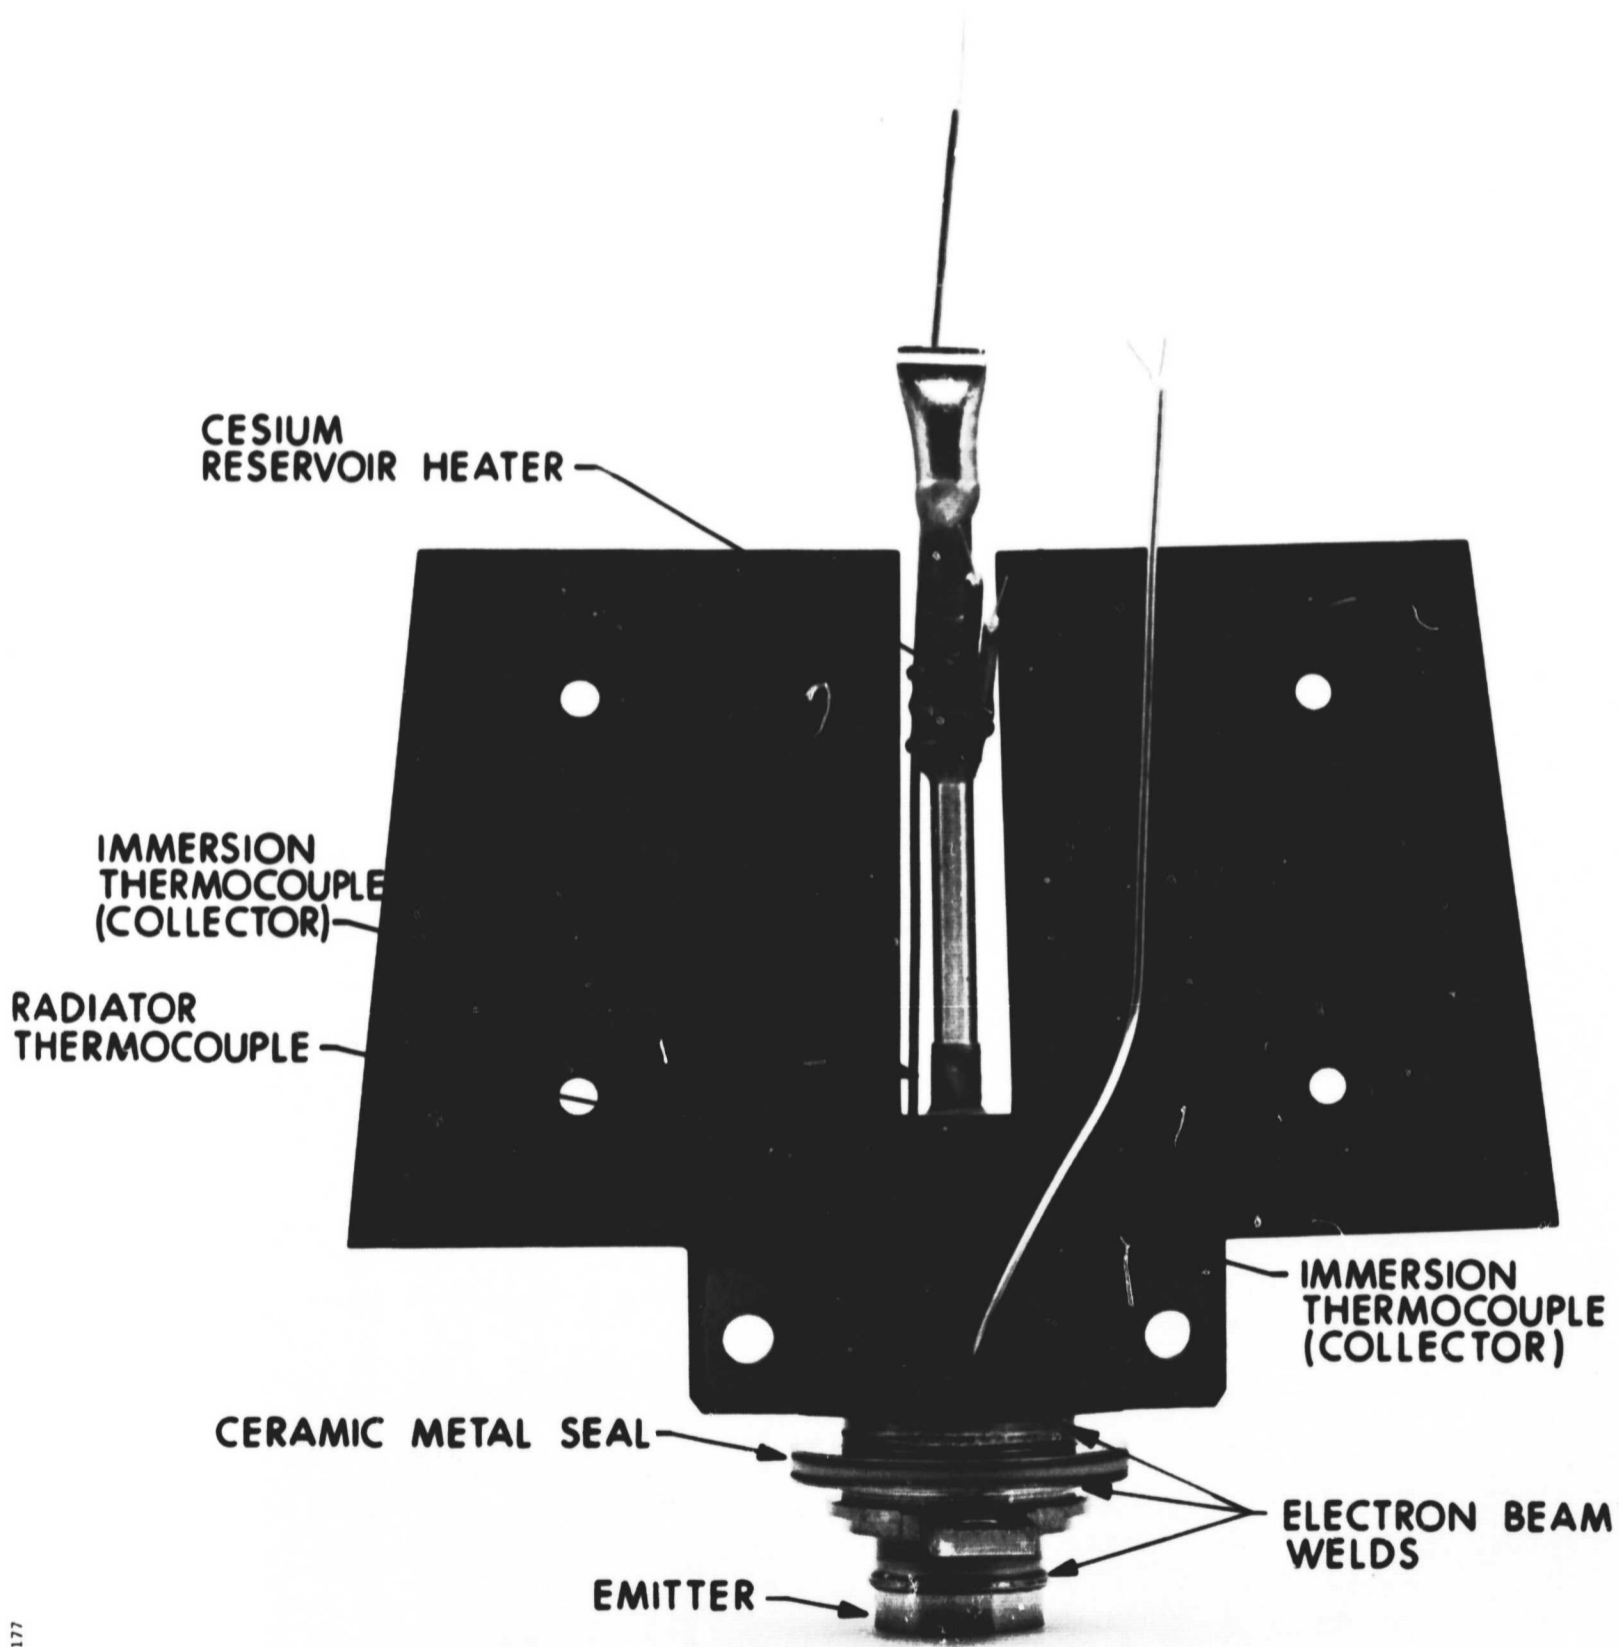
Converter SN-109 Indicating the Position of Electron Beam Welds and Thermocouples
